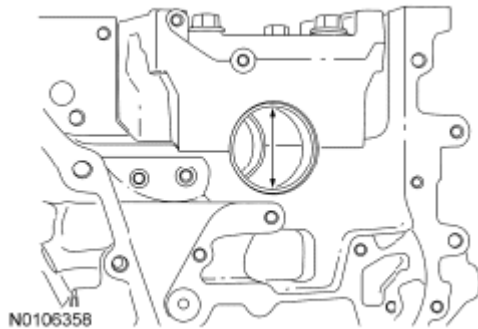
Identifying Crankshaft Block Main Bearing Bore Diameter
